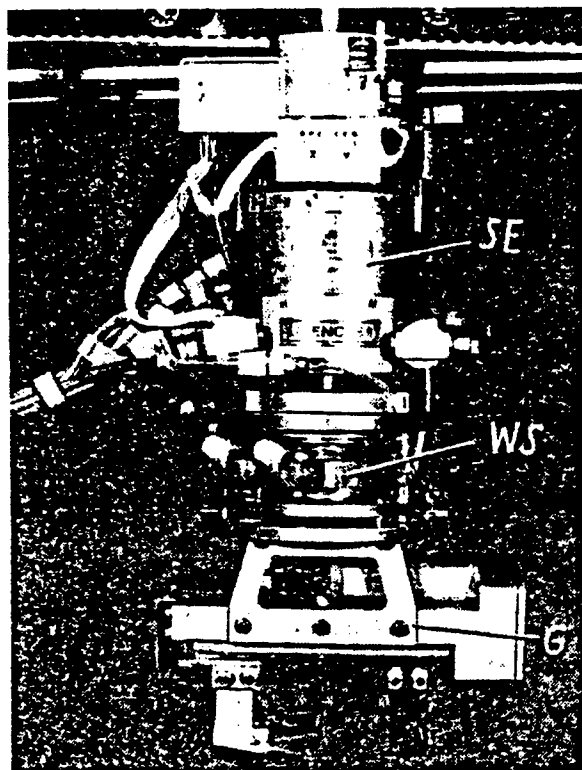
Assembly hand. SE sensor unit WS changing system; G gripper.
